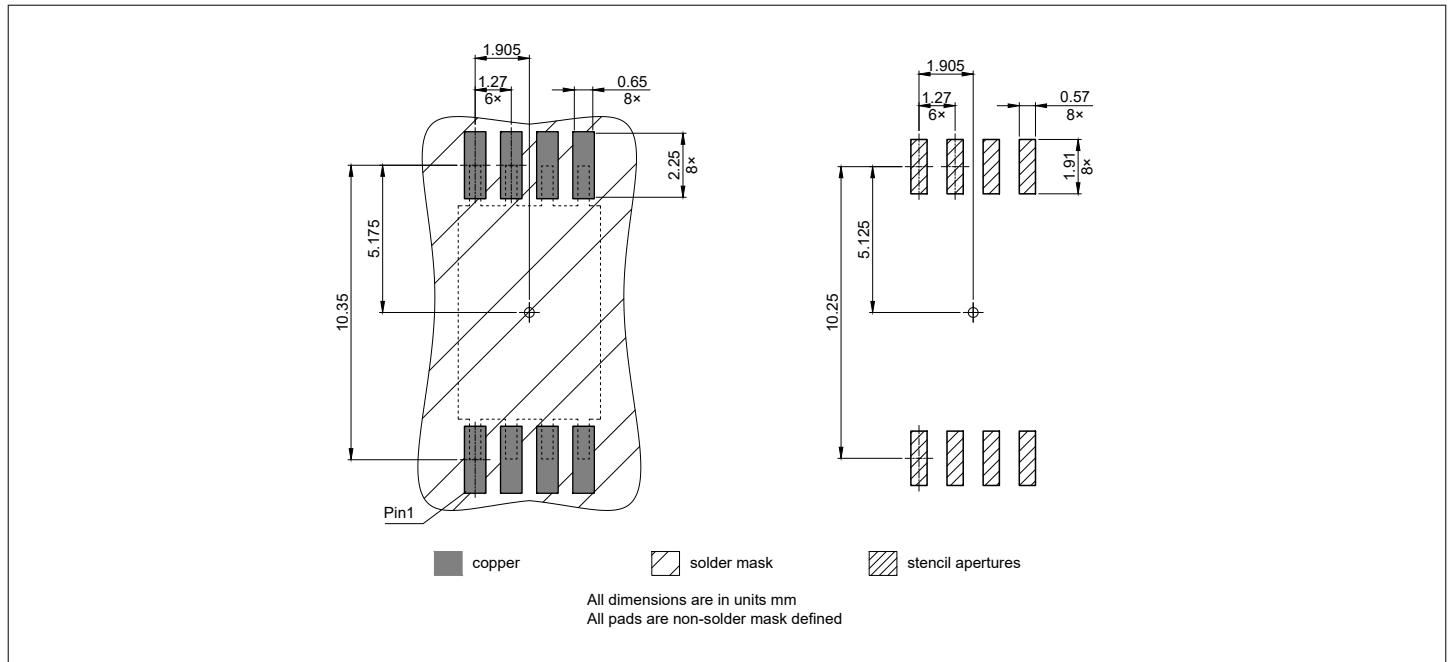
PG-LDSO-8 (300 mil) alternative footprint
